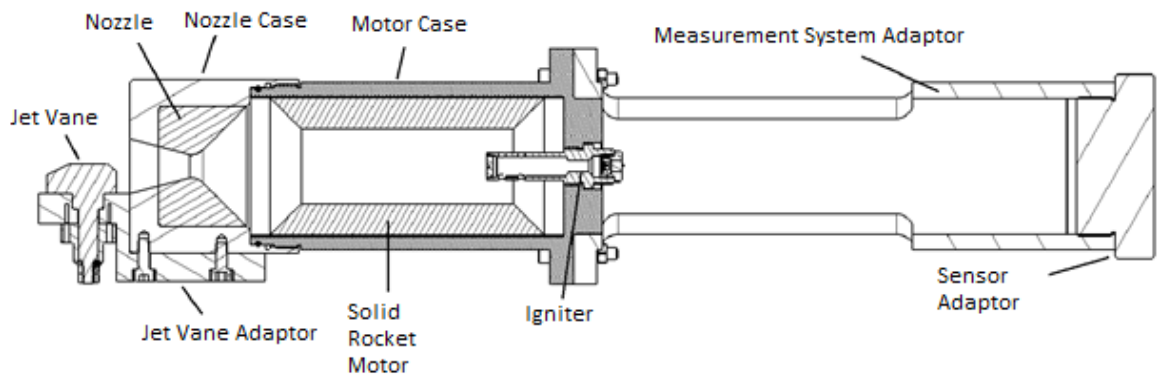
Solid rocket motor, nozzle and jet vane technical drawing
